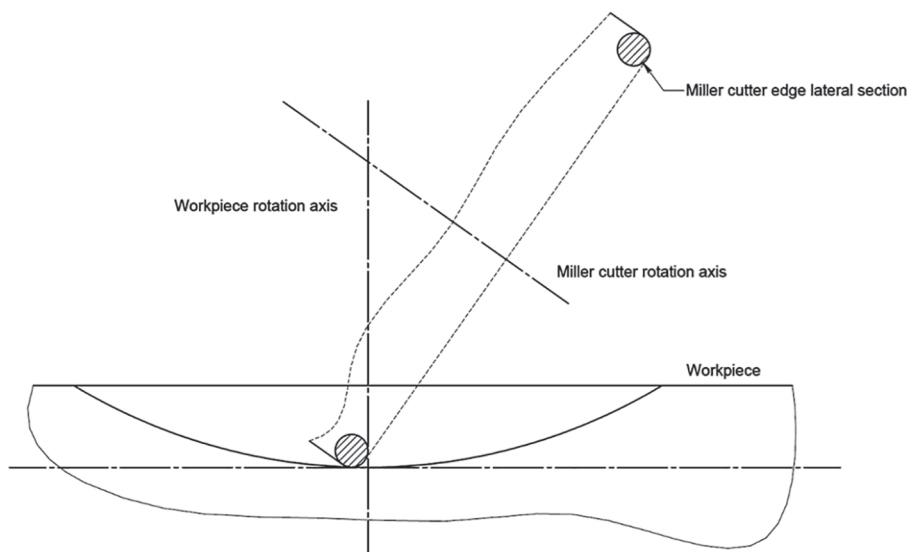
Cross-section of the milling cutter and workpiece during processing
